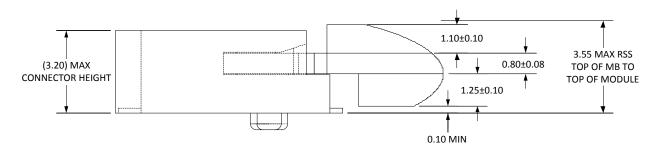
H3.2-D1 - Stack-up Top Mount Double-sided Module for 1.20 Maximum Top-side Component Height
